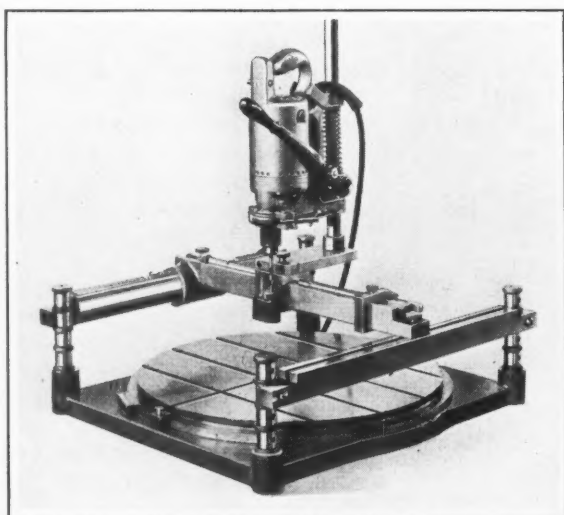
Fixture that can be Used for Laying Out and Drilling Work or for Milling Templets
